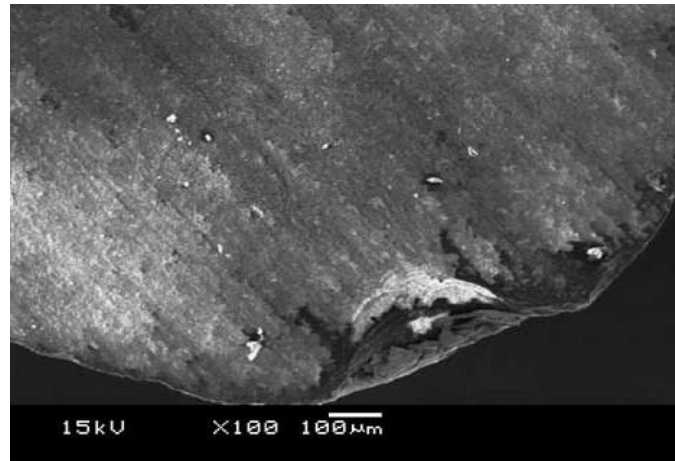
7 Wear and adhering workpiece material at rake face while high-speed milling of Ti-6Al-4V alloy (59)
